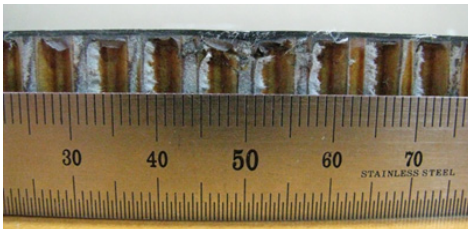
Section view of damaged specimen at 10J impact energy.
